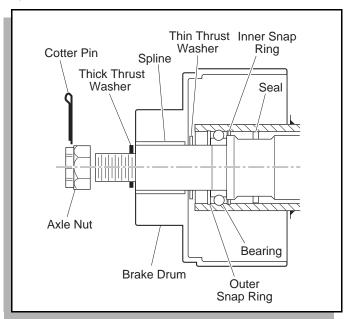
Cut Away of Outer Bearing and Brake Drum
